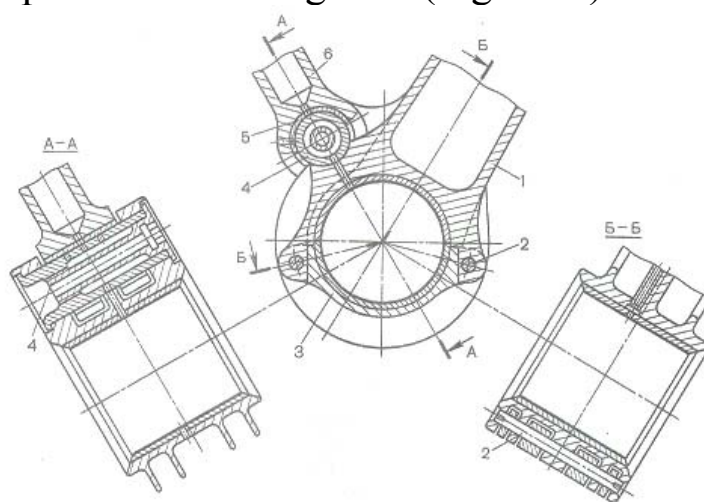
Articulated connecting rods: 1 - crank head of the main connecting rod; 2 – split pins-pins; 3 - bottom cover; 4 - pin; 5 - bushing; 6 - connecting rod
